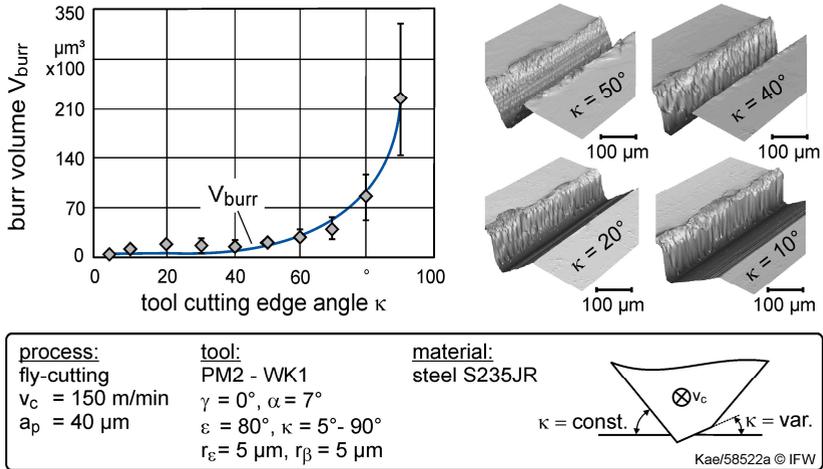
Impact of the tool cutting edge angle on the lateral burr dimensions
